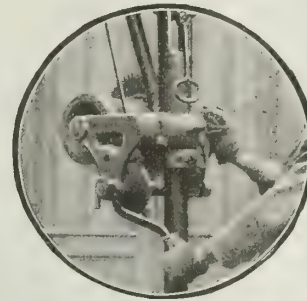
AUTOMATIC GEAR SHIFTING BRAKE DEVICE IN OPERATION
